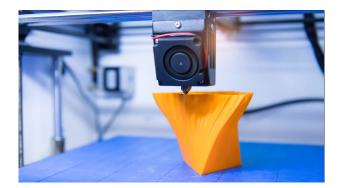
3D-Printer in process of printing, layer upon layer. [22]
